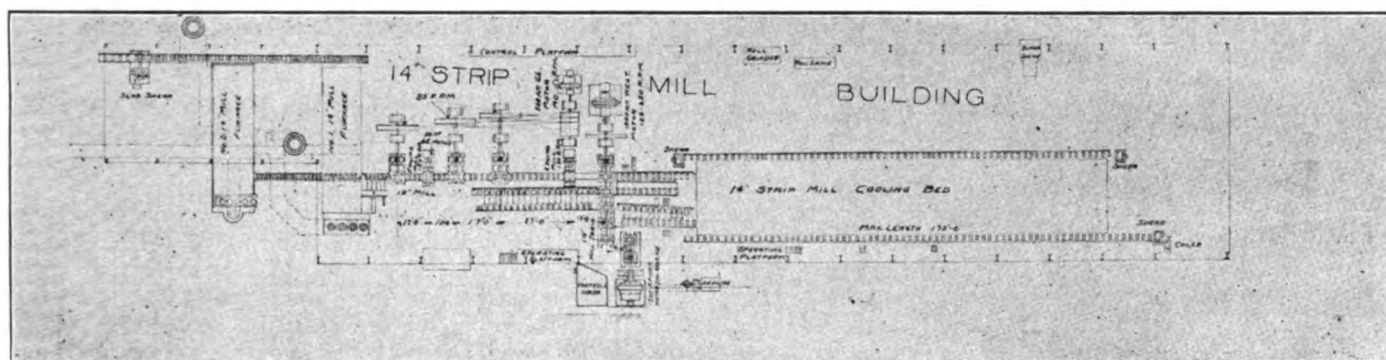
14-in. Strip mill. Sharon Steel Hoop Company, 1927.
